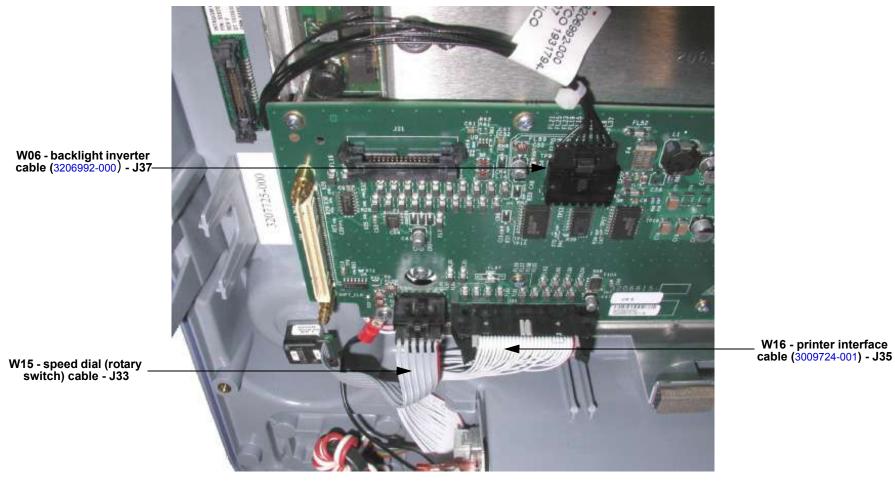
Interface PCB cable connection locations - view 2 of 2
